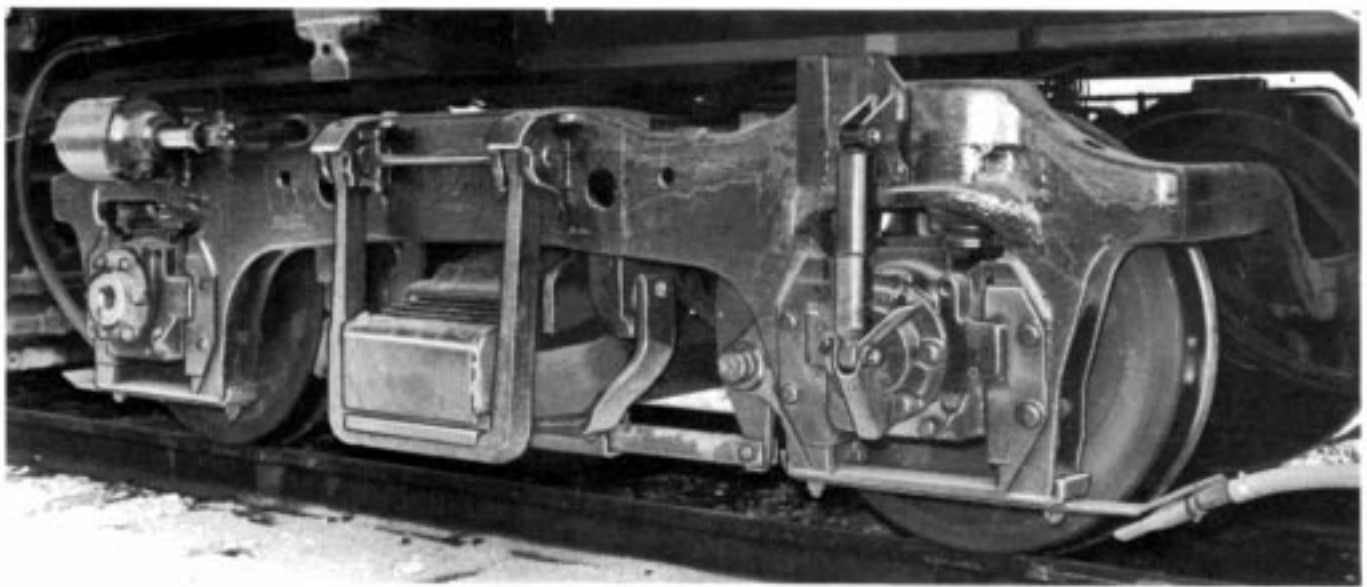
GP Truck Assembly With Single Brake Shoe Rigging And Inclined Rubber Suspension
